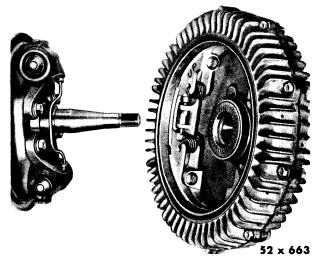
Removing or Installing Hub and Brake Housing Assembly (Front Disc Brake)
